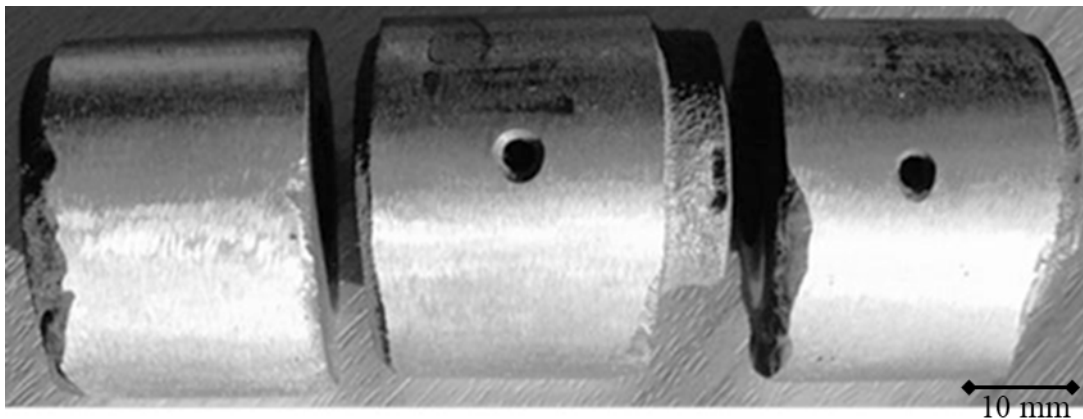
Surface morphology of *EN-GJV-400* camshaft after conventional *TIG* remelting
